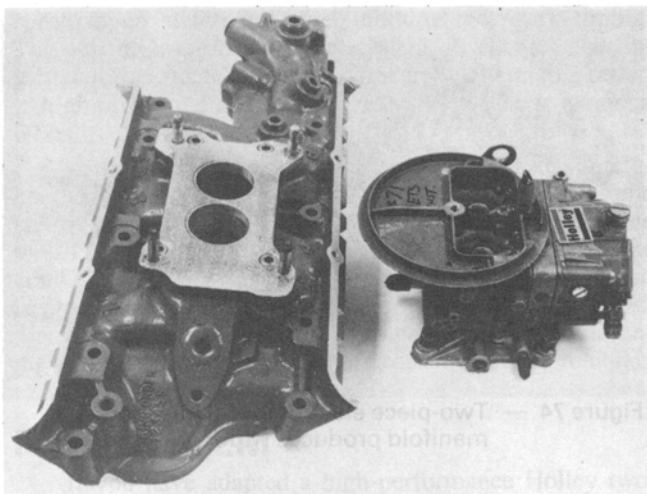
Production two-barrel intake manifold modified for 500cfm Holley carburetor.
